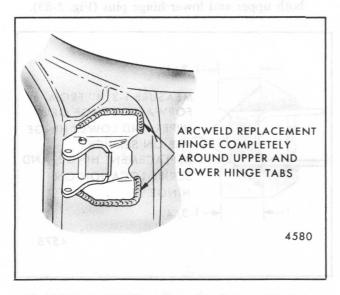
Body Side Hinge Strap Installation - "X" Styles
